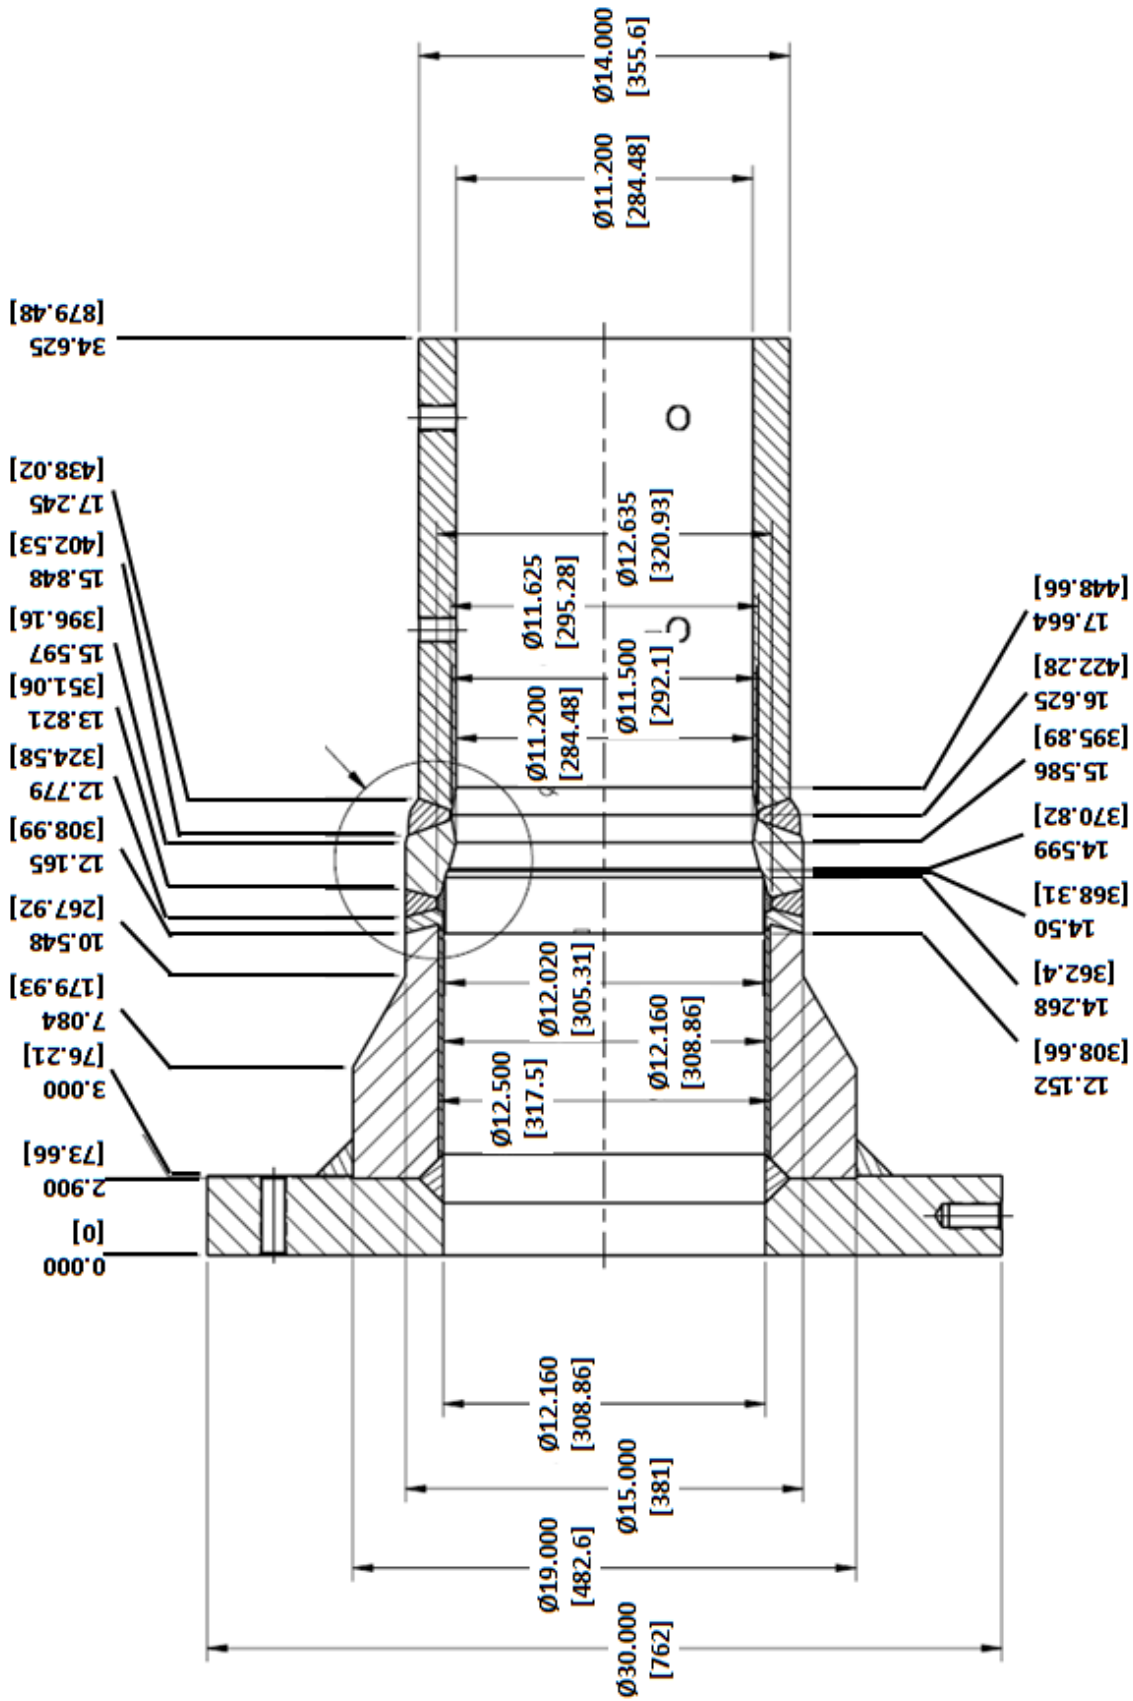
Phase 2b Mockup Geometry (Dimensions in inches [millimeters])
